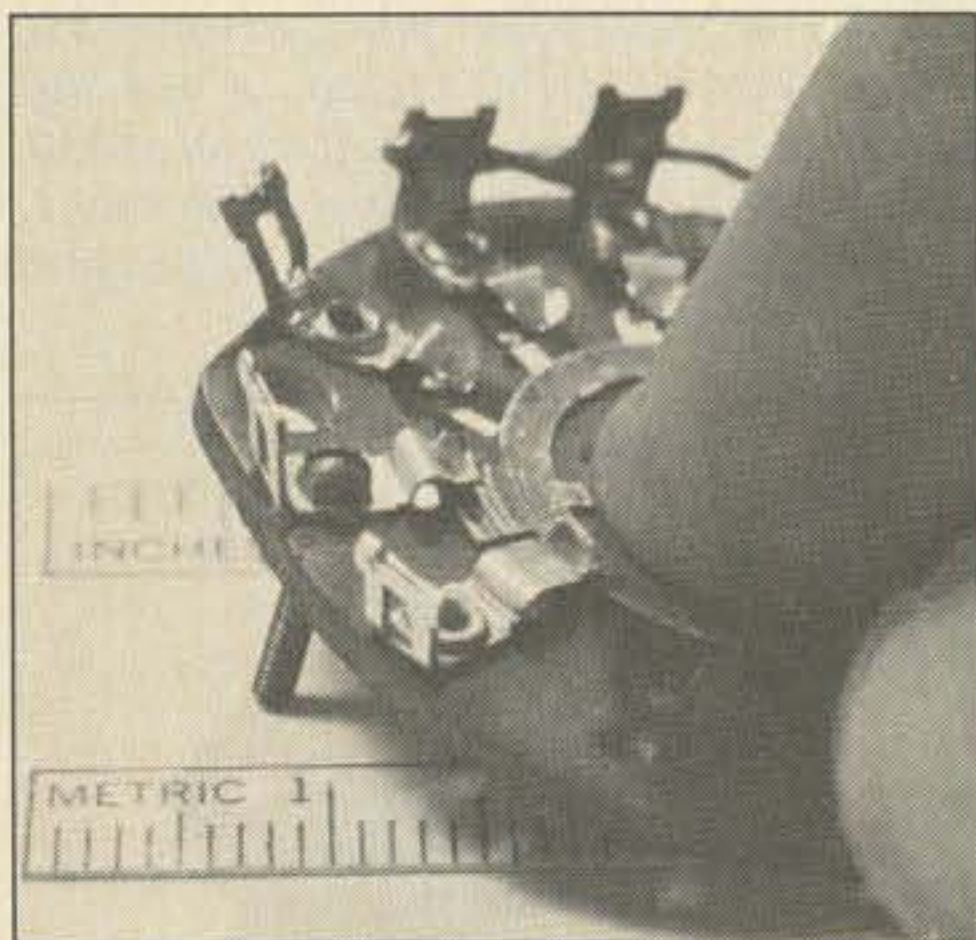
Photo E. Close-up of index assembly showing contact tooth fastened with 0-80 hardware. The 0-80 screw in this photo is a little longer than needed. Note fingers holding wafer.
